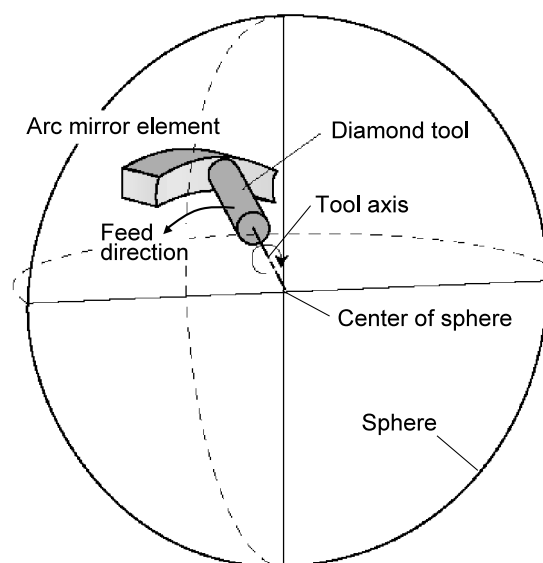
Method for feeding a sphere type tool for machining an arc mirror element
